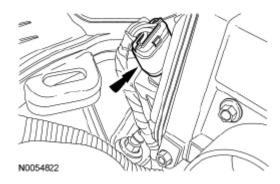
Locating PCV Hose Courtesy of FORD MOTOR CO.
